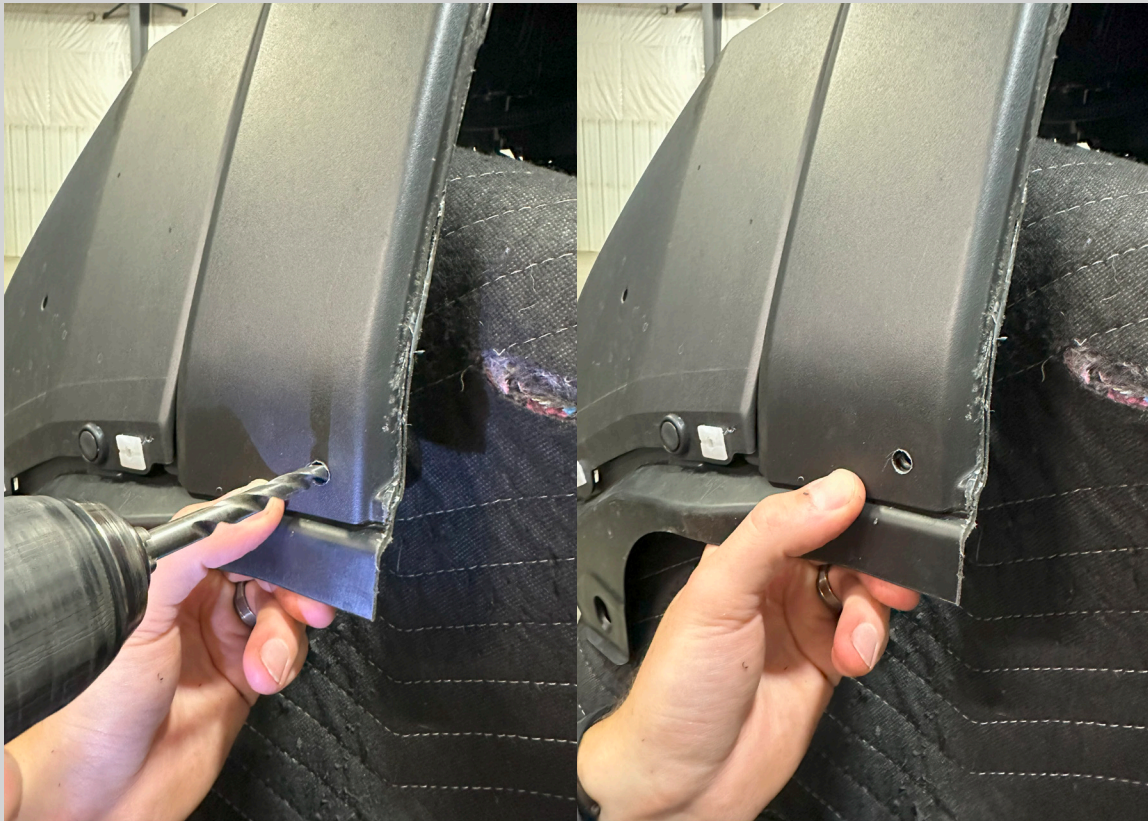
Drill a 9/32" hole about 1" in and up from the lower back inside edge of the center black trim panel.
